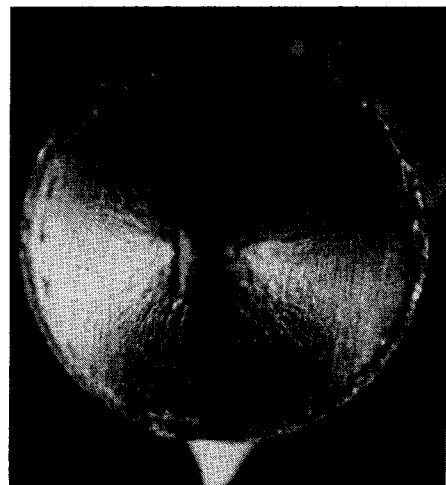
Fractured 302SS Miniaturized Disk Bend Test specimen at 25 X showing fracture location.
